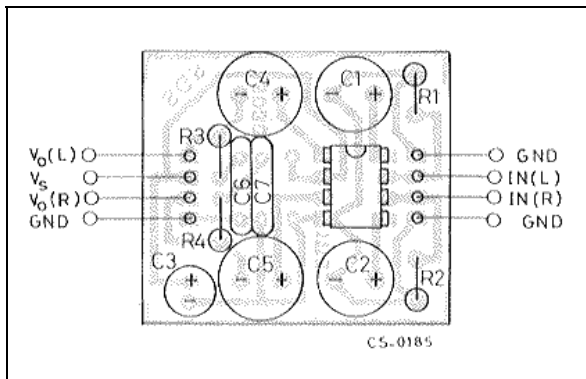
P.C. Board and Components Layout of the Circuit of Figure 2
